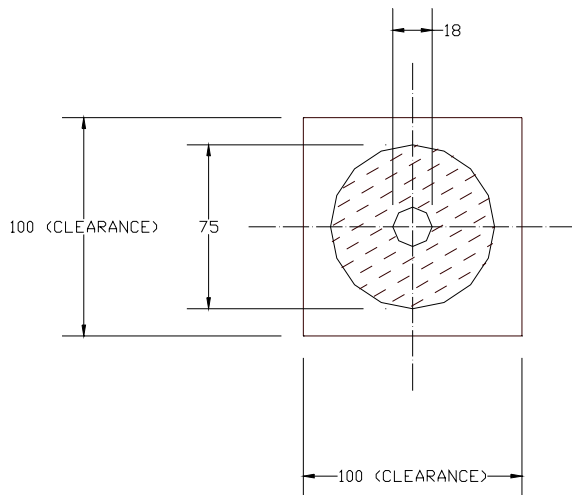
SSD1306Z2 alignment mark dimensions
